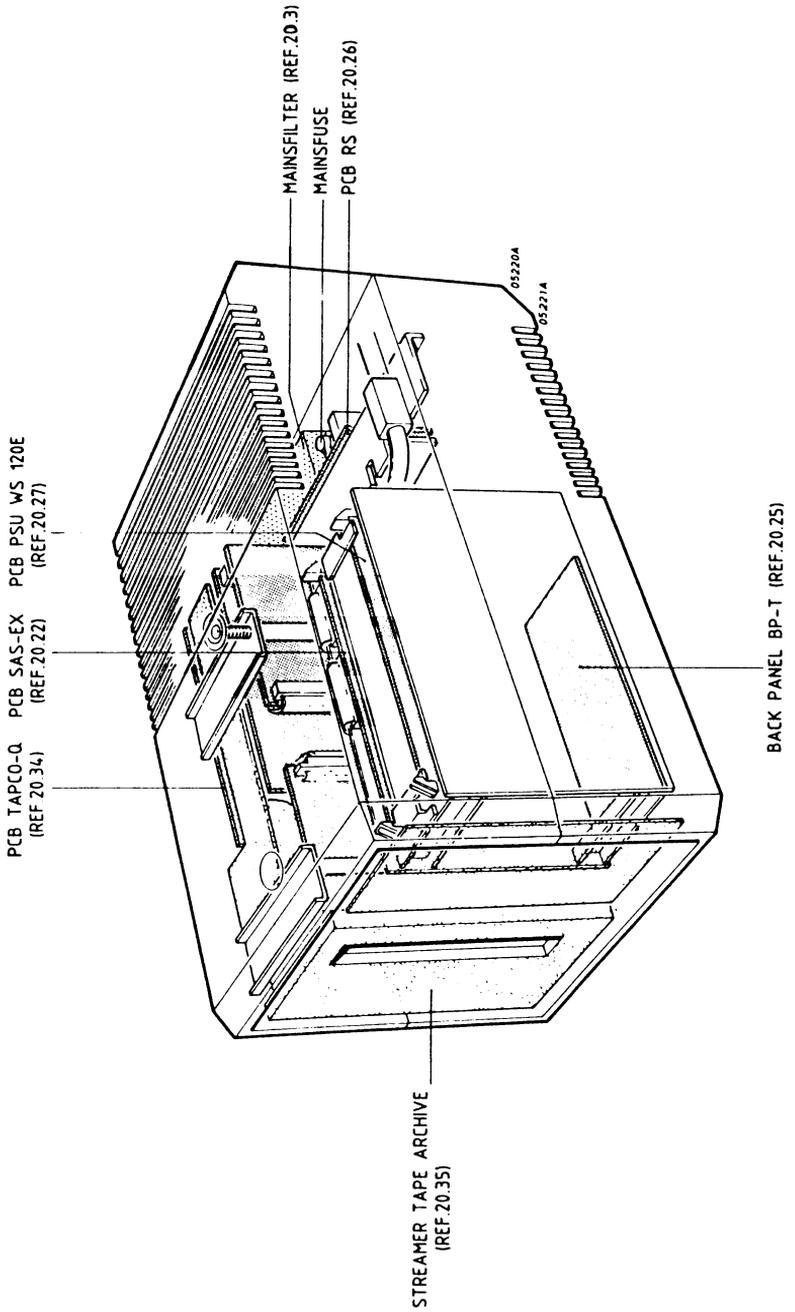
LOCATOR OF EXTENSION CABINET P3013
